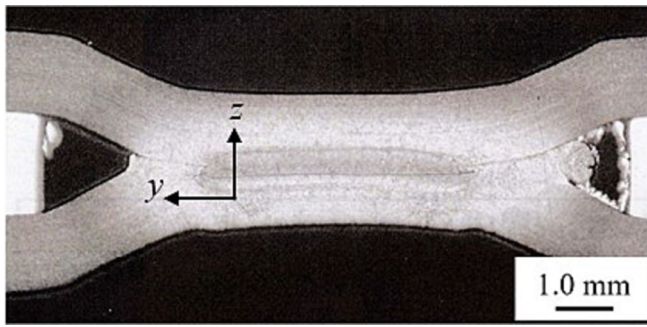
Cross-section of DSW-2 specimen. DSW, dimple spot welding.
